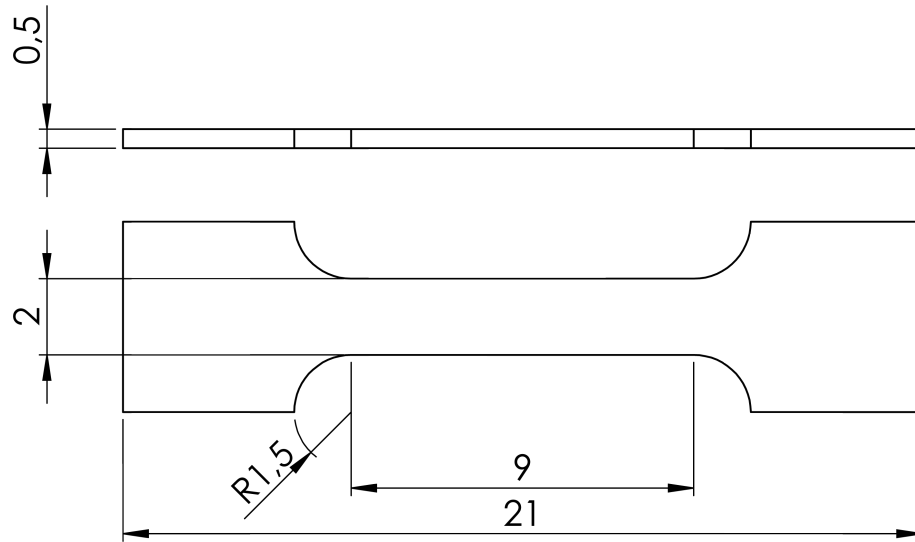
Drawing including detailed dimensions of the micro flat tensile specimen. All values in mm.
